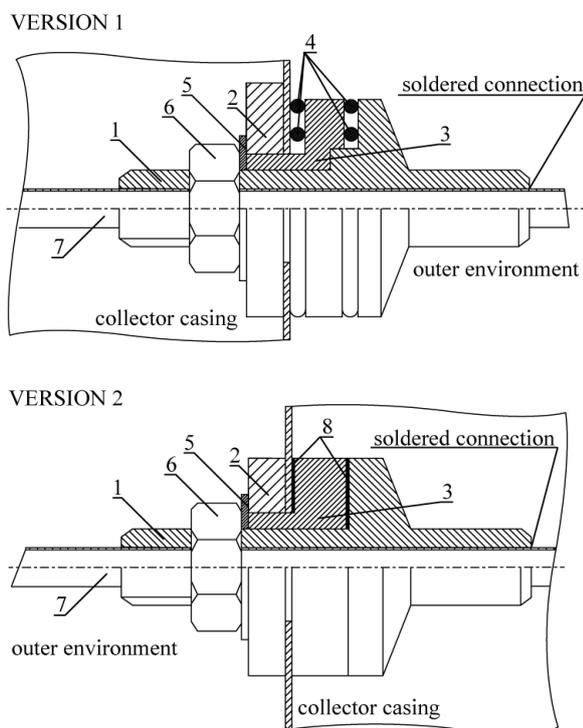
Design of vacuum insulation fitting in two versions - with silicone O-rings, and the layer of sealant.
